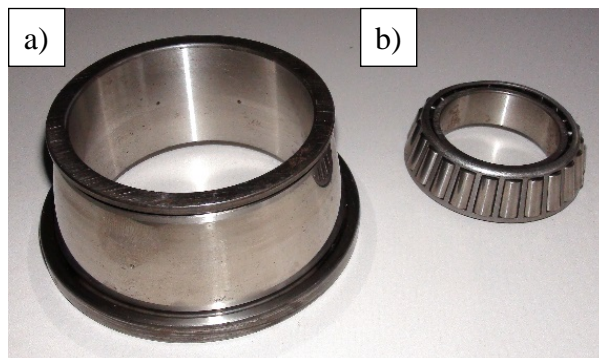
Elements manipulated by an industrial manipulator: a) inner ring of bearing, b) tapered roller bearing
